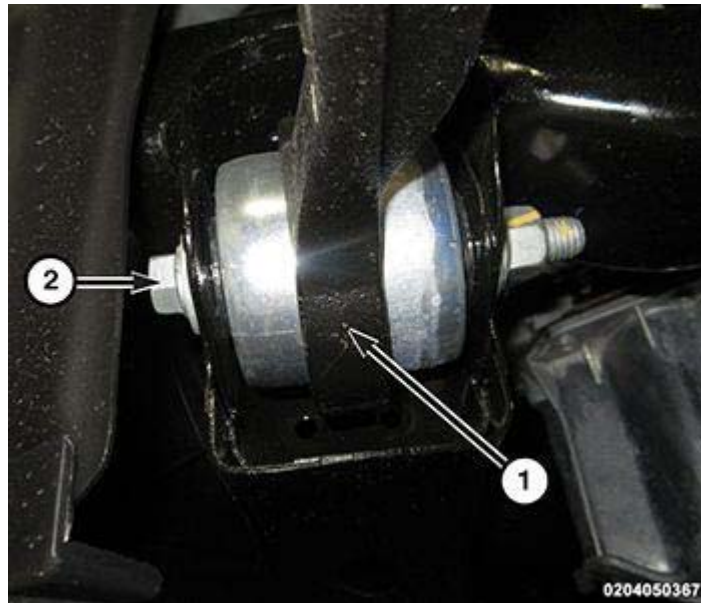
Tension Strut & Tension Strut To Cradle Bolt And Nut
